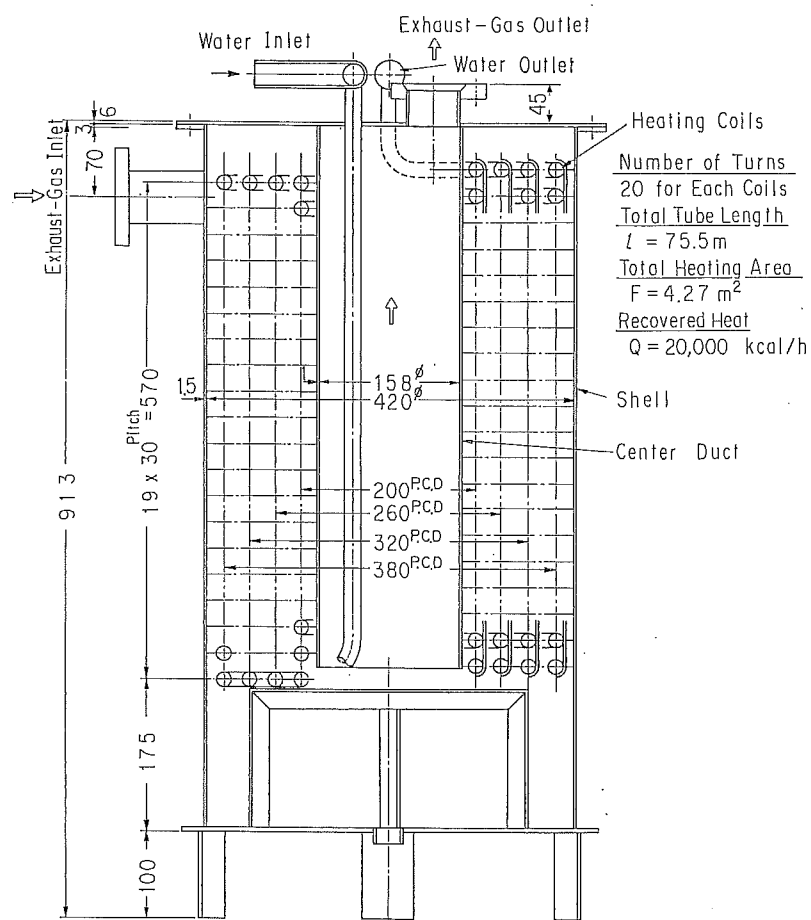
Shell-and-coil type exhaust-gas heat exchanger with a bottom chamber for collecting soot (JARE-16/18).
